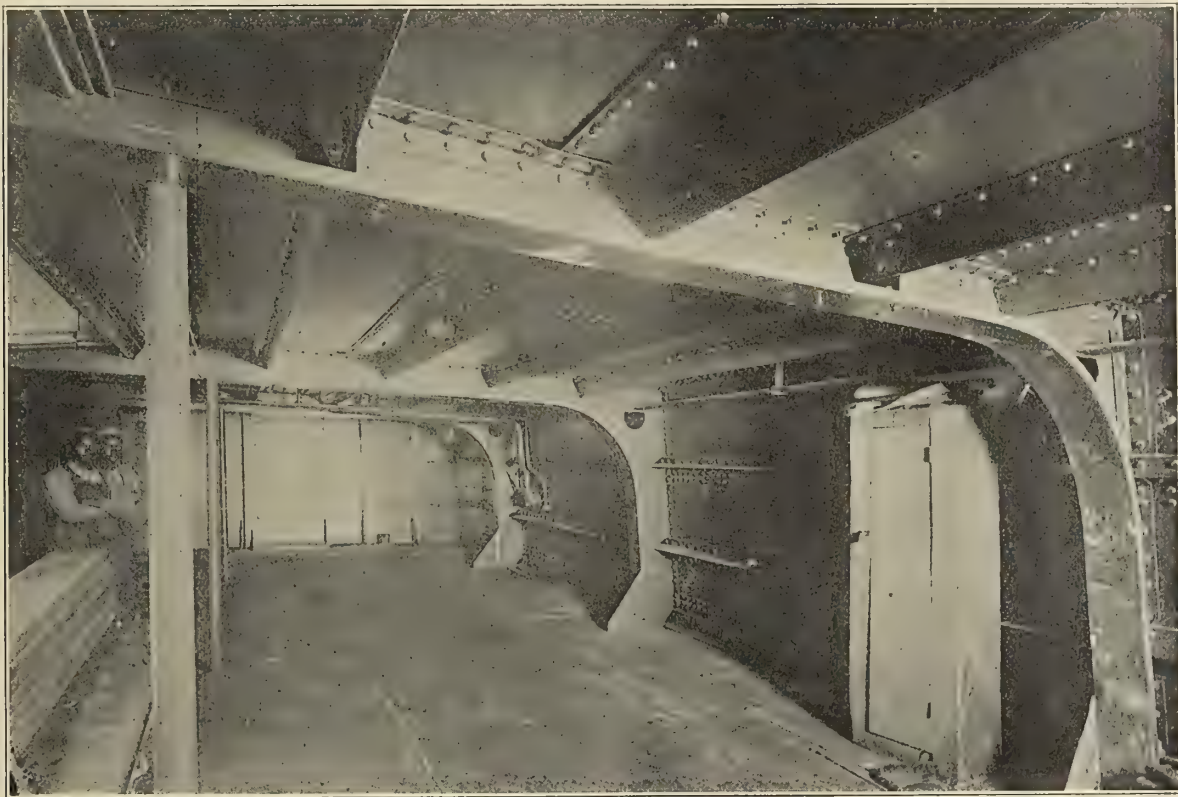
CONSTRUCTION OF BRIDGE ENCLOSURE ON THE LONGITUDINALLY FRAMED FREIGHT STEAMSHIP RUTH.
